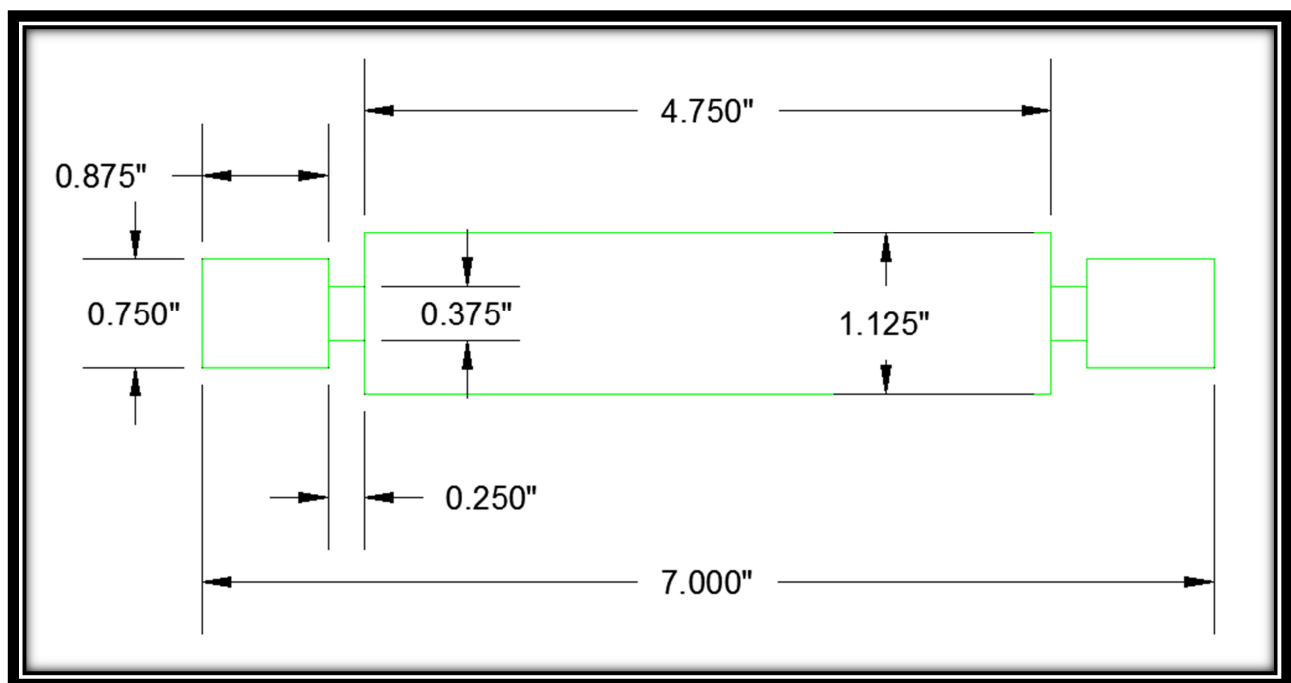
Axle Holding System - Cylindrical Axle Piece Dimensions
